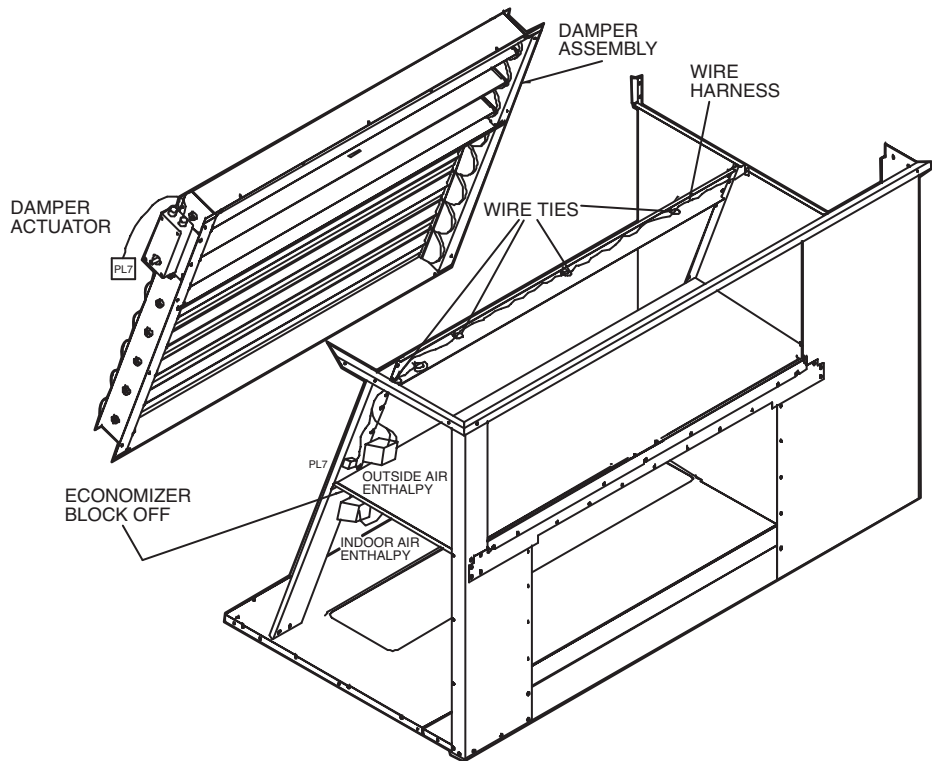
EconoMiSer IV Component Locations (Exploded View)
